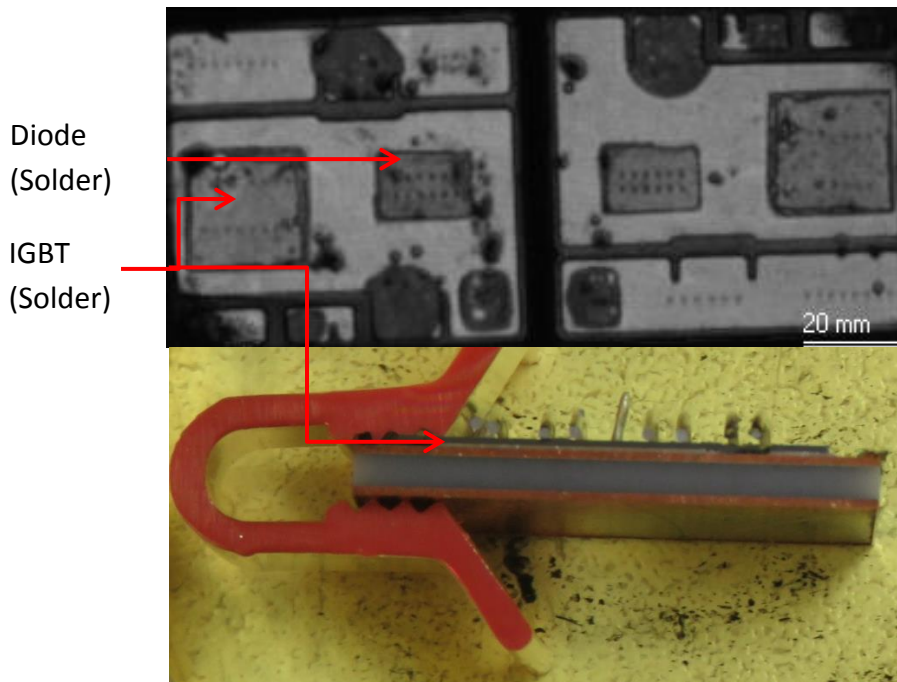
Scanning acoustic microscope image of IGBT and diode solder & cross-section showing solder layer
